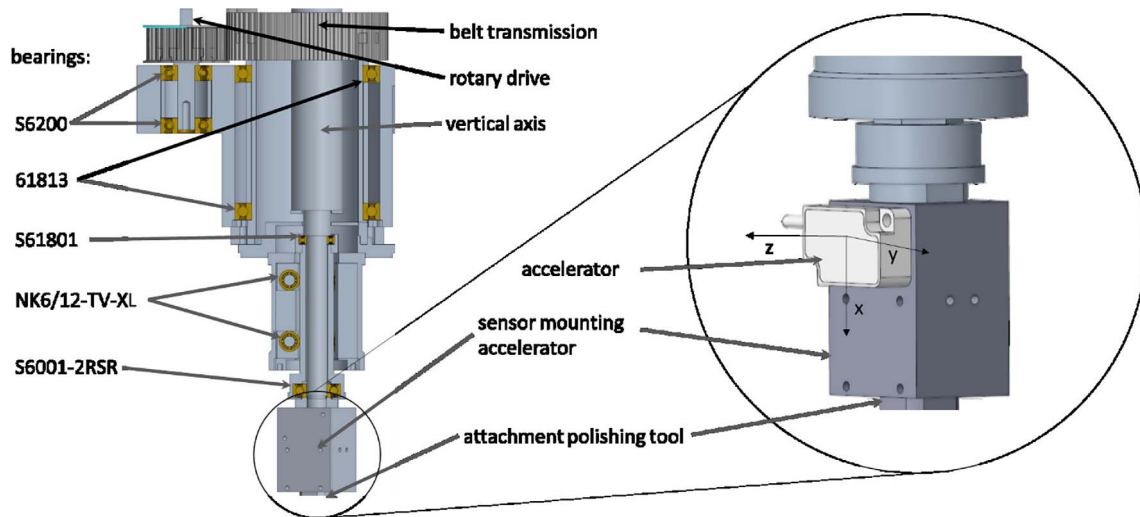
Sectional view of a robot polishing head with vibration sensor attachment and all ball bearings and damaged.
